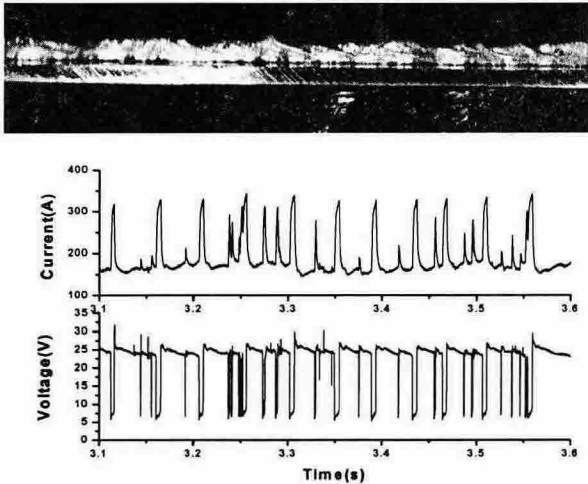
Welding bead and waveform at torch angle 0°.
